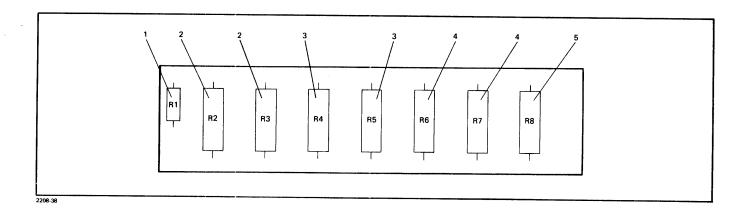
Test Point Assembly (A12A1), Parts Location Diagram
